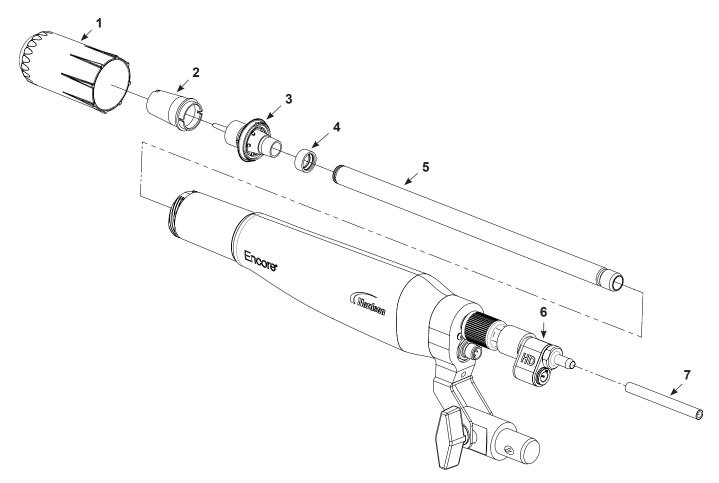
Maintenance - Bar-Mount Spray Gun Shown without Pivot Mount (shown with HD diffuser)
